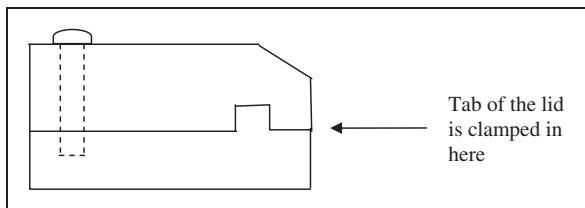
Clip used to attach to the tab on the lid to the hydraulic test machine.
